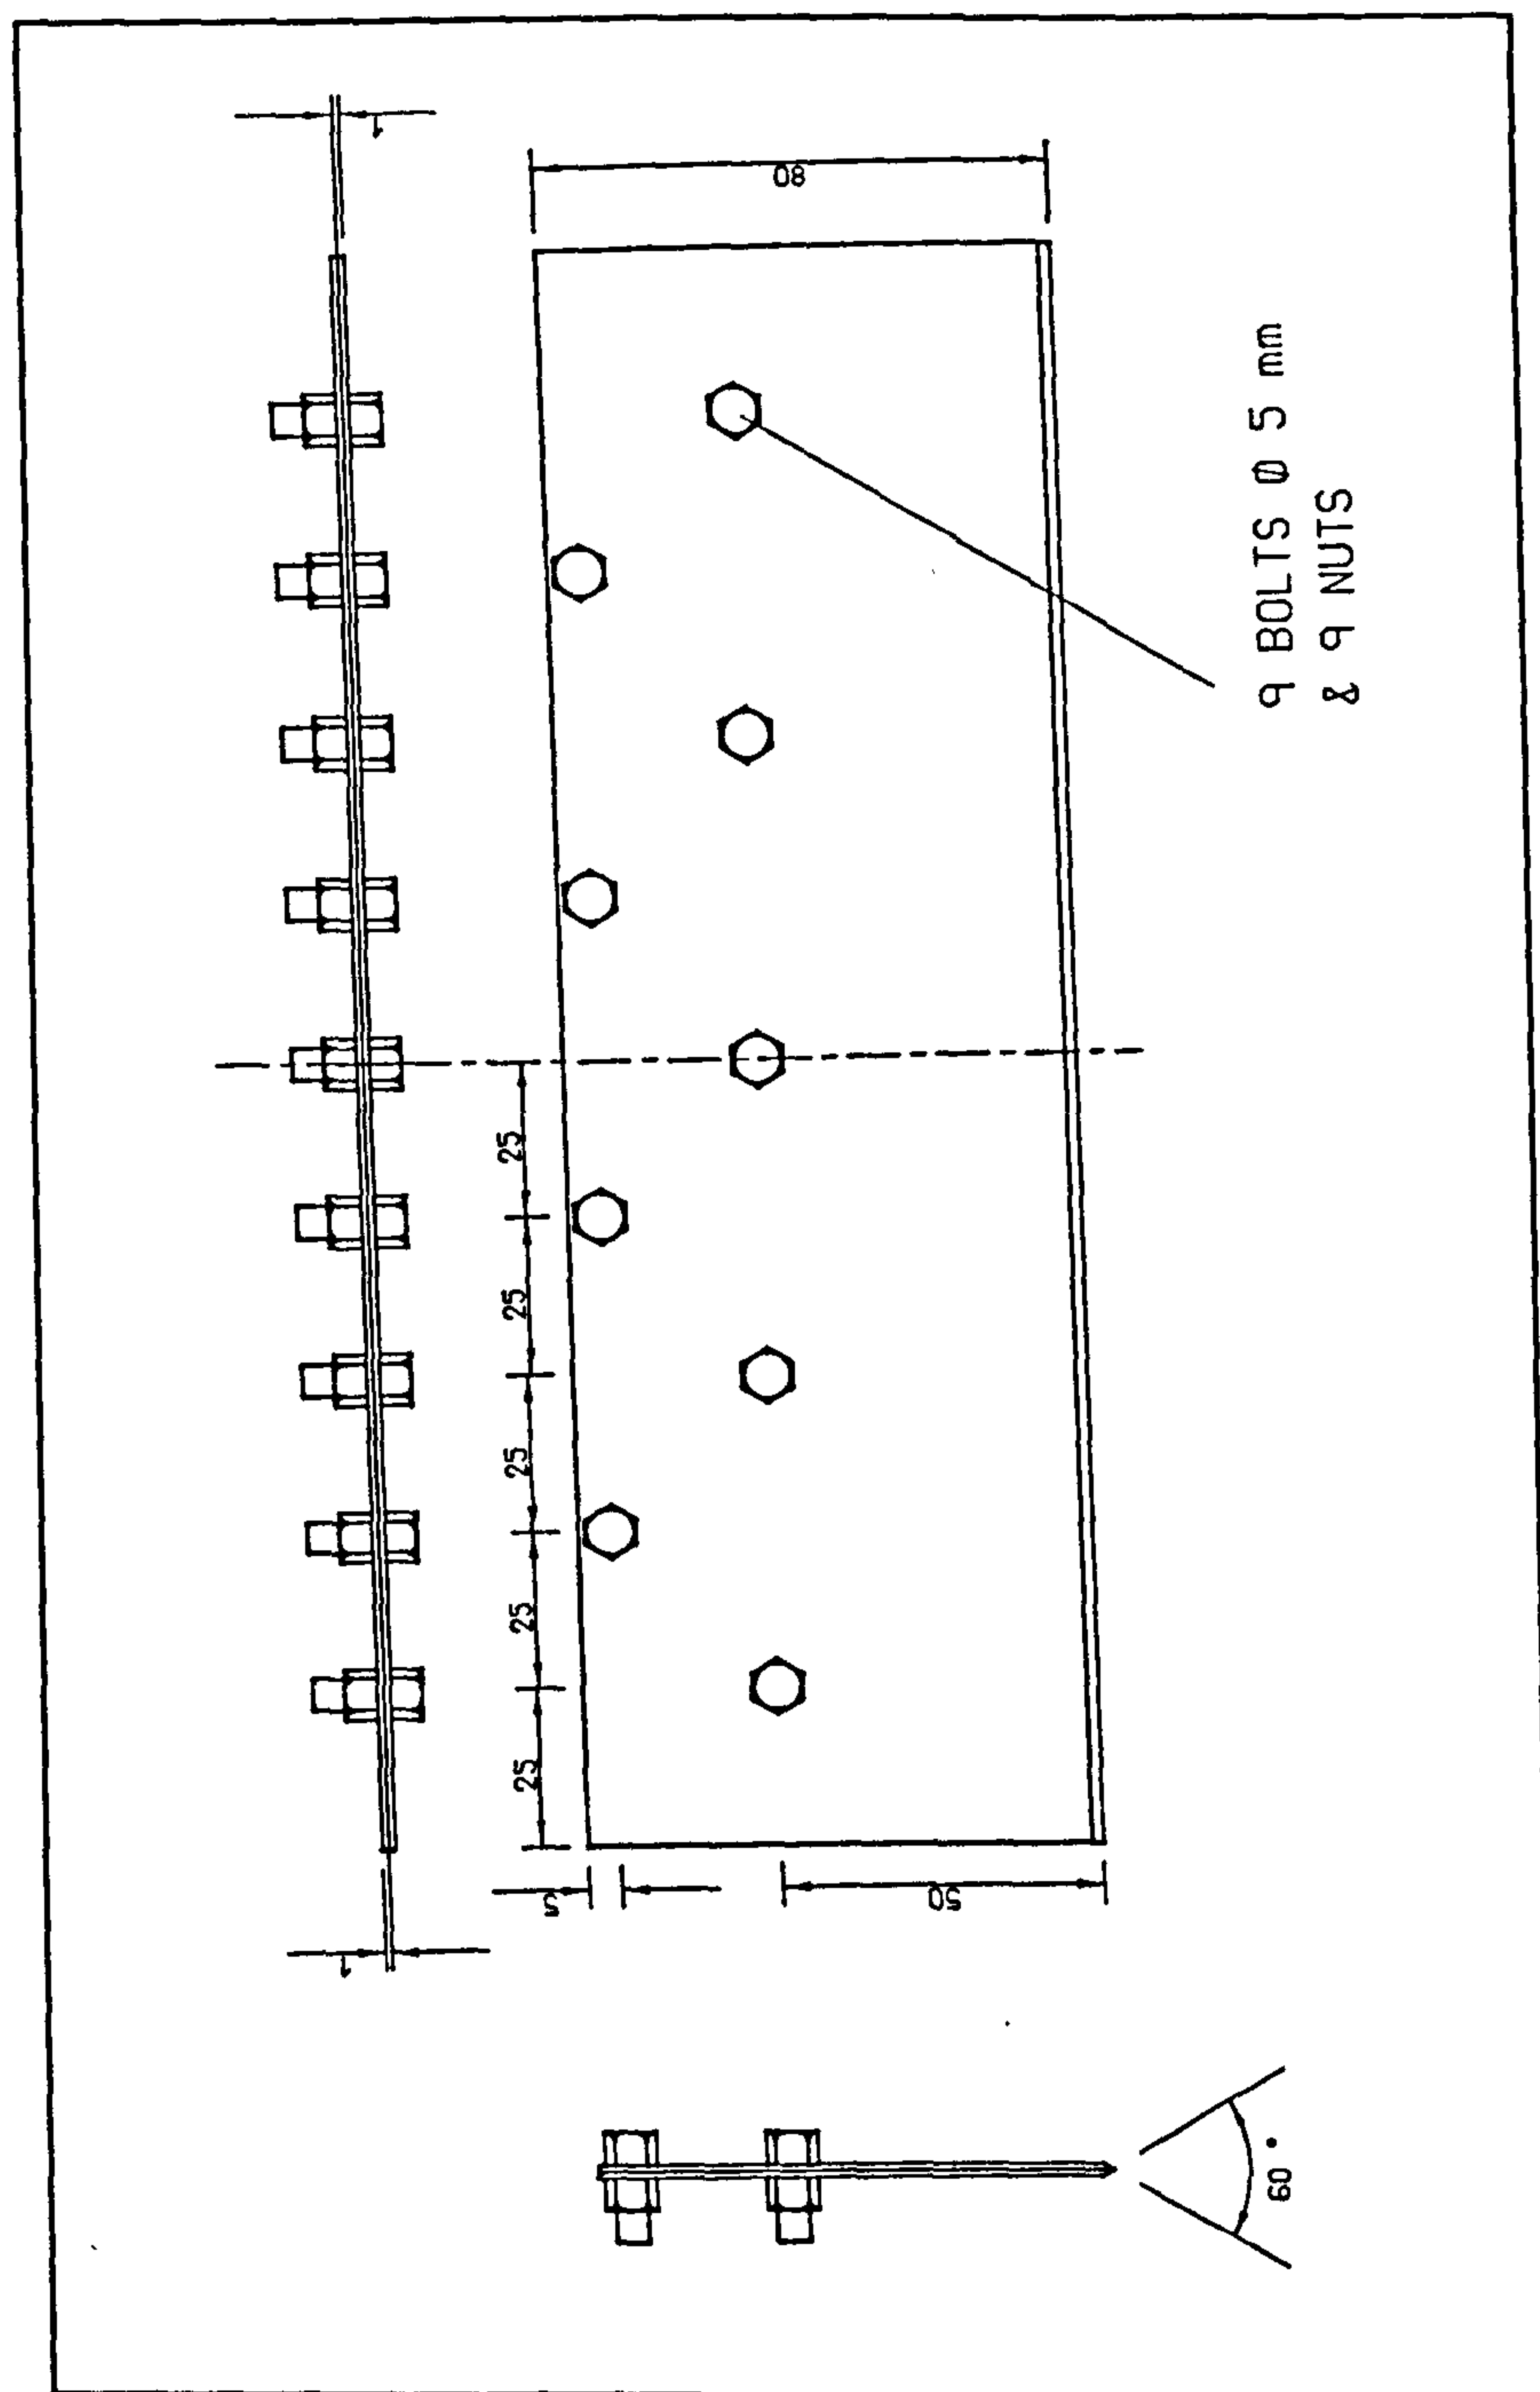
The trapping plates used for the casting of the CMM specimen.
